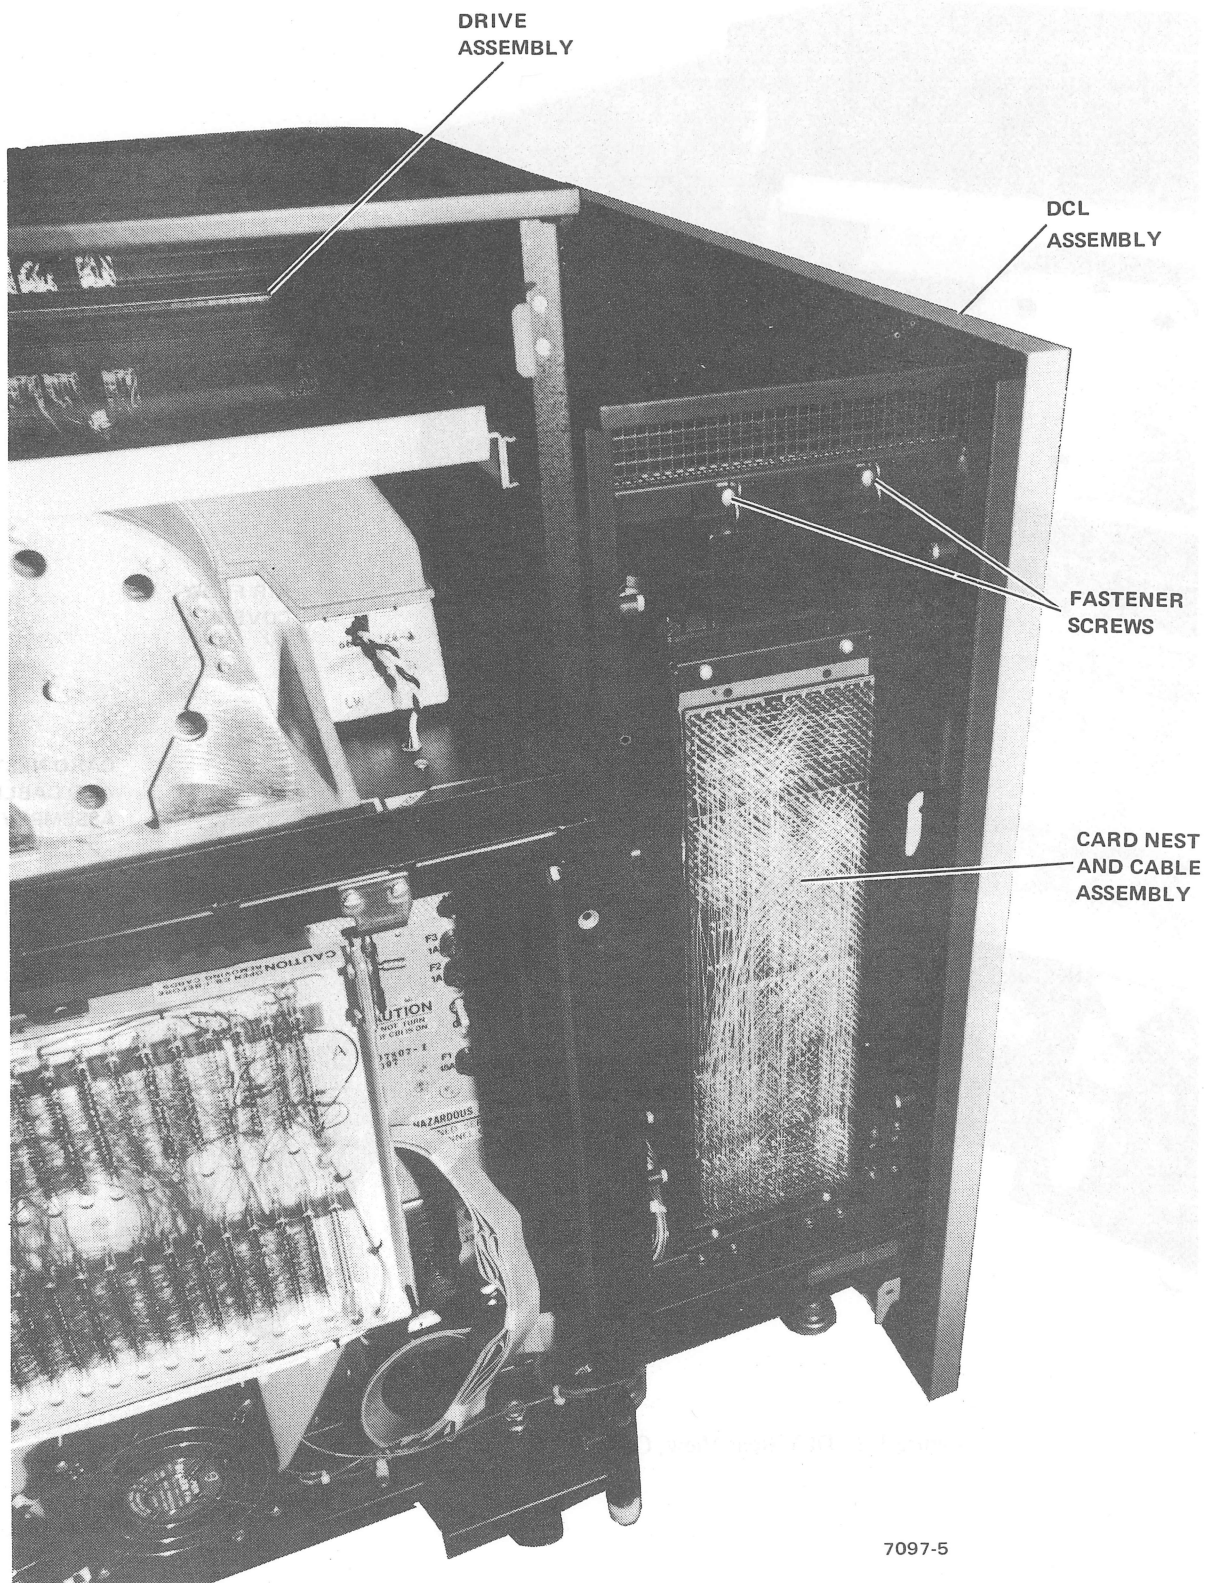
RP04 Drive and DCL Assemblies Back View, Rear Panels Removed
